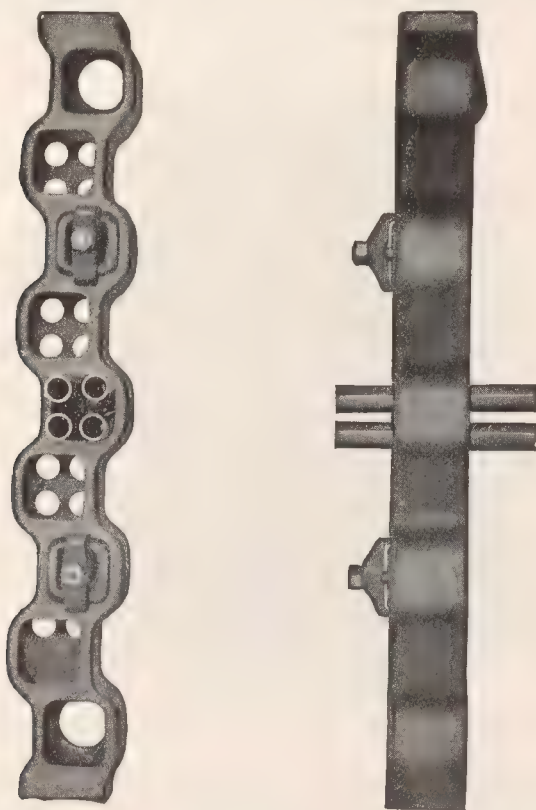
B. & W. Boiler. Forged Steel Header. Handhole Covering Group of Four 2-inch Tubes.
